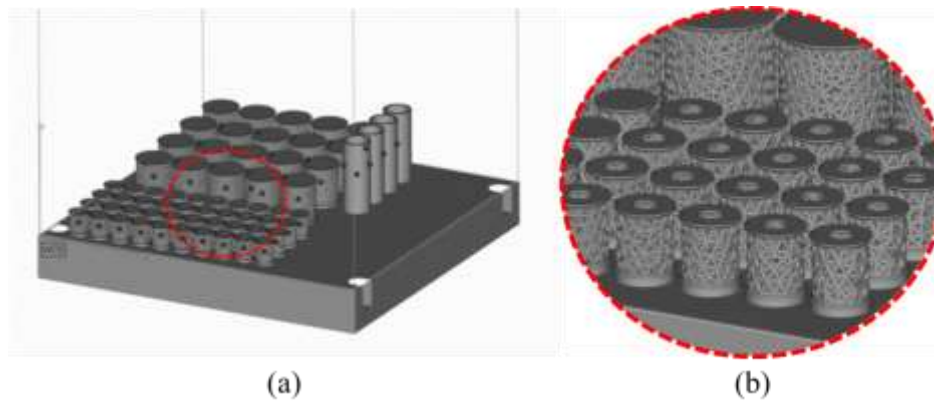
Build layout of the cylindrical AlSi10Mg specimens.
